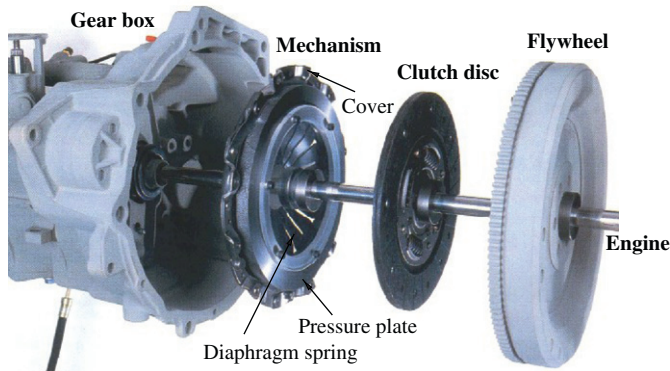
View of the clutch. The clutch disc is crushed between the mechanism pressure plate and the flywheel to transmit the torque from the combustion engine to the transmission.
